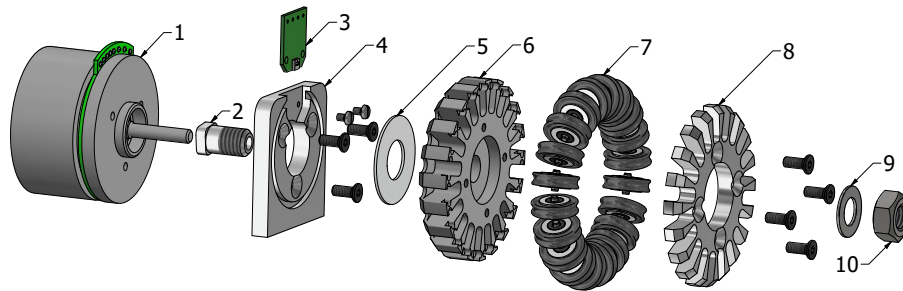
v2020 powertrain. 1) Motor. 2) Shaft adapter. 3) Encoder PCB. 4) Mounting block. 5) Optical encoder disk. 6) Wheel base. 7) Subwheels. 8) Wheel cover. 9) Spring washer. 10) Hex nut.
